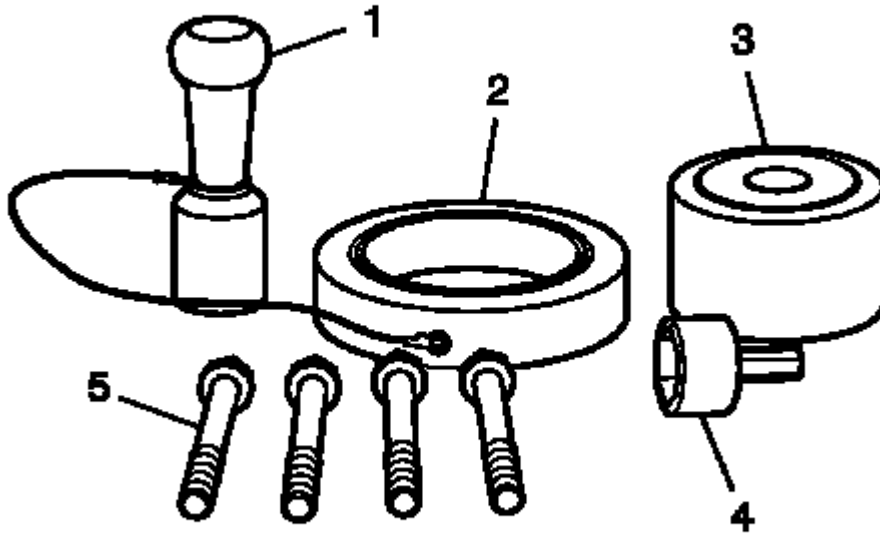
Cylinder Liner Trimming Tools View (2 Of 2)
